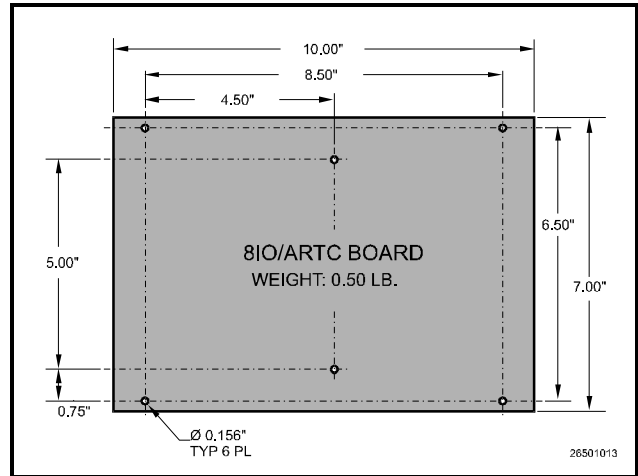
8IO/ARTC Mounting Dimensions
